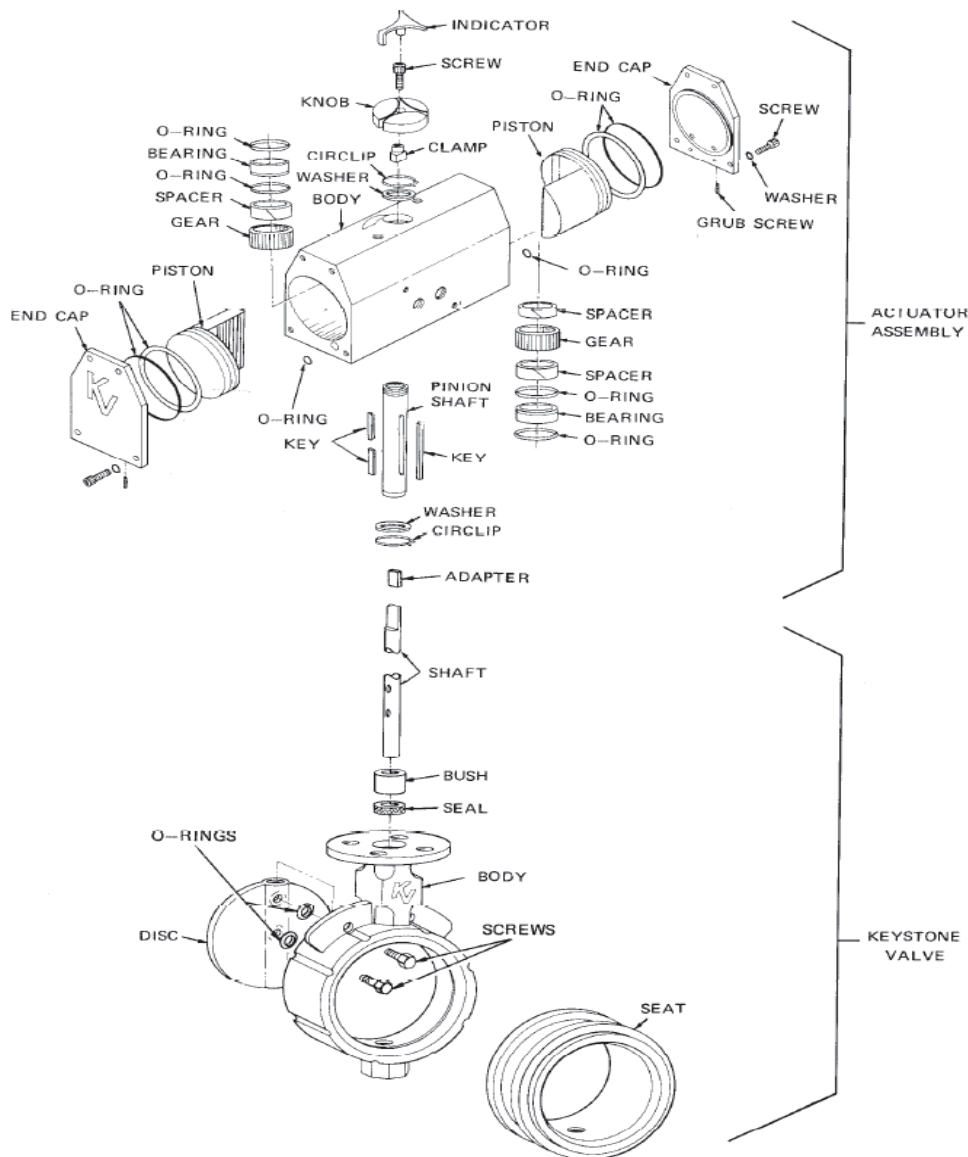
Keystone Valve and Actuator Assembly – Exploded View
